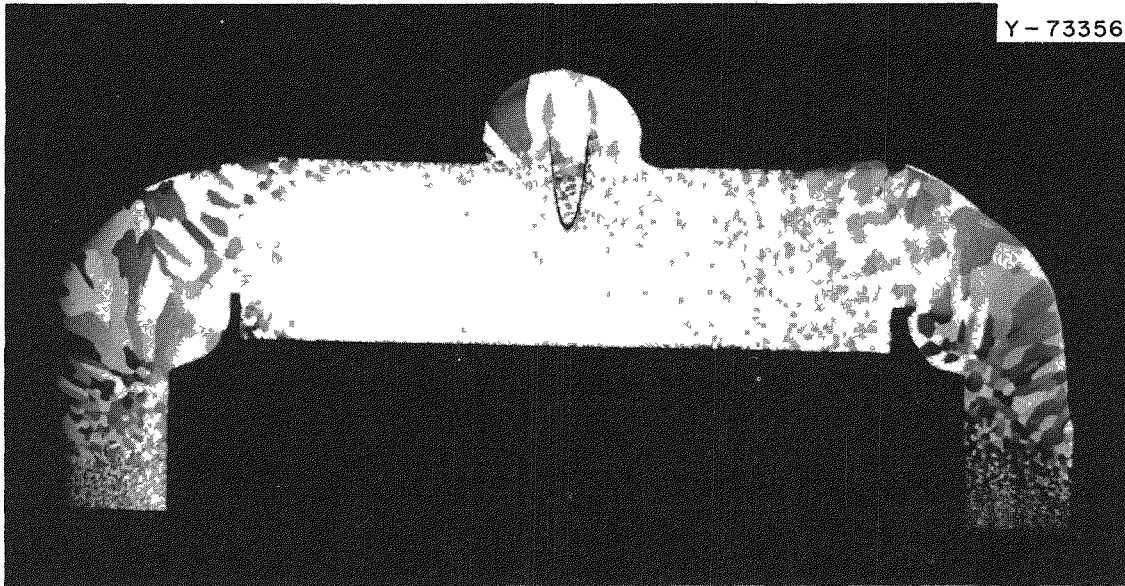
Typical Primary Closure Weld of a TZM Container. 3.5 $\times$ . Note that the weld is sound and that full penetration was achieved.
